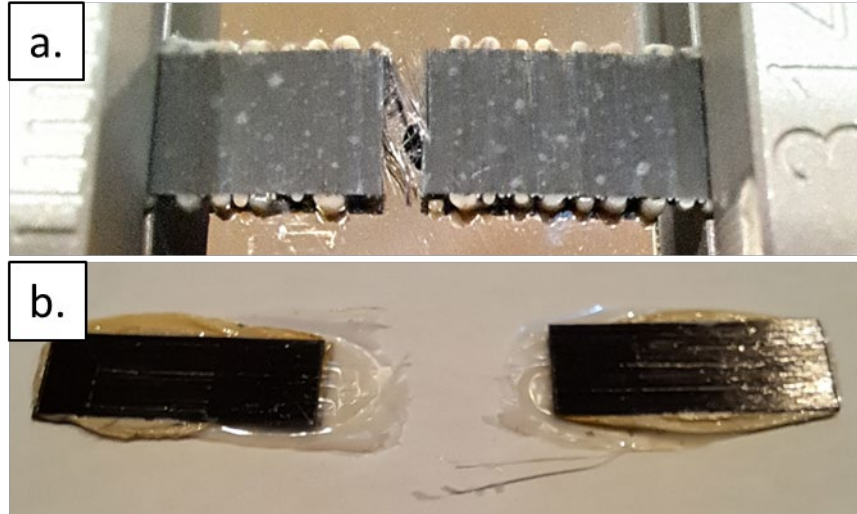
Example failed specimens a. shows PEKK prepreg with fibers bridging the failure b. PEEK film exhibits stretching and out of plane deformation.
